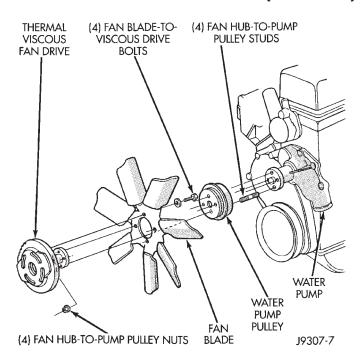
Fan Mounting Nuts—4.0L 6-Cyl. Engine
